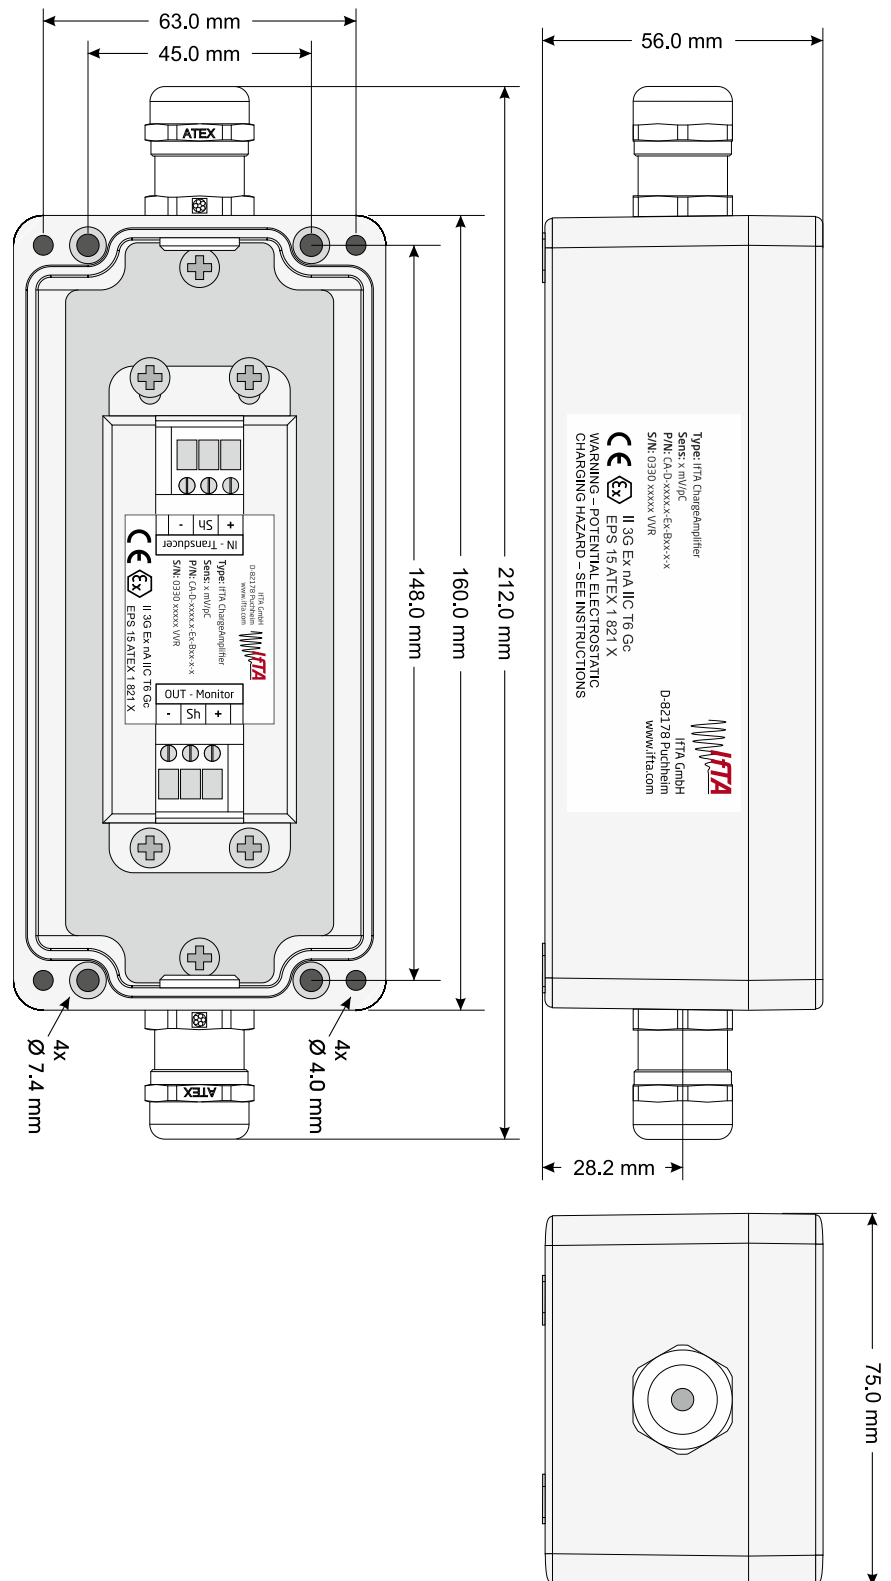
Dimensions of the industrial housing (figure similar, subject to modification)
